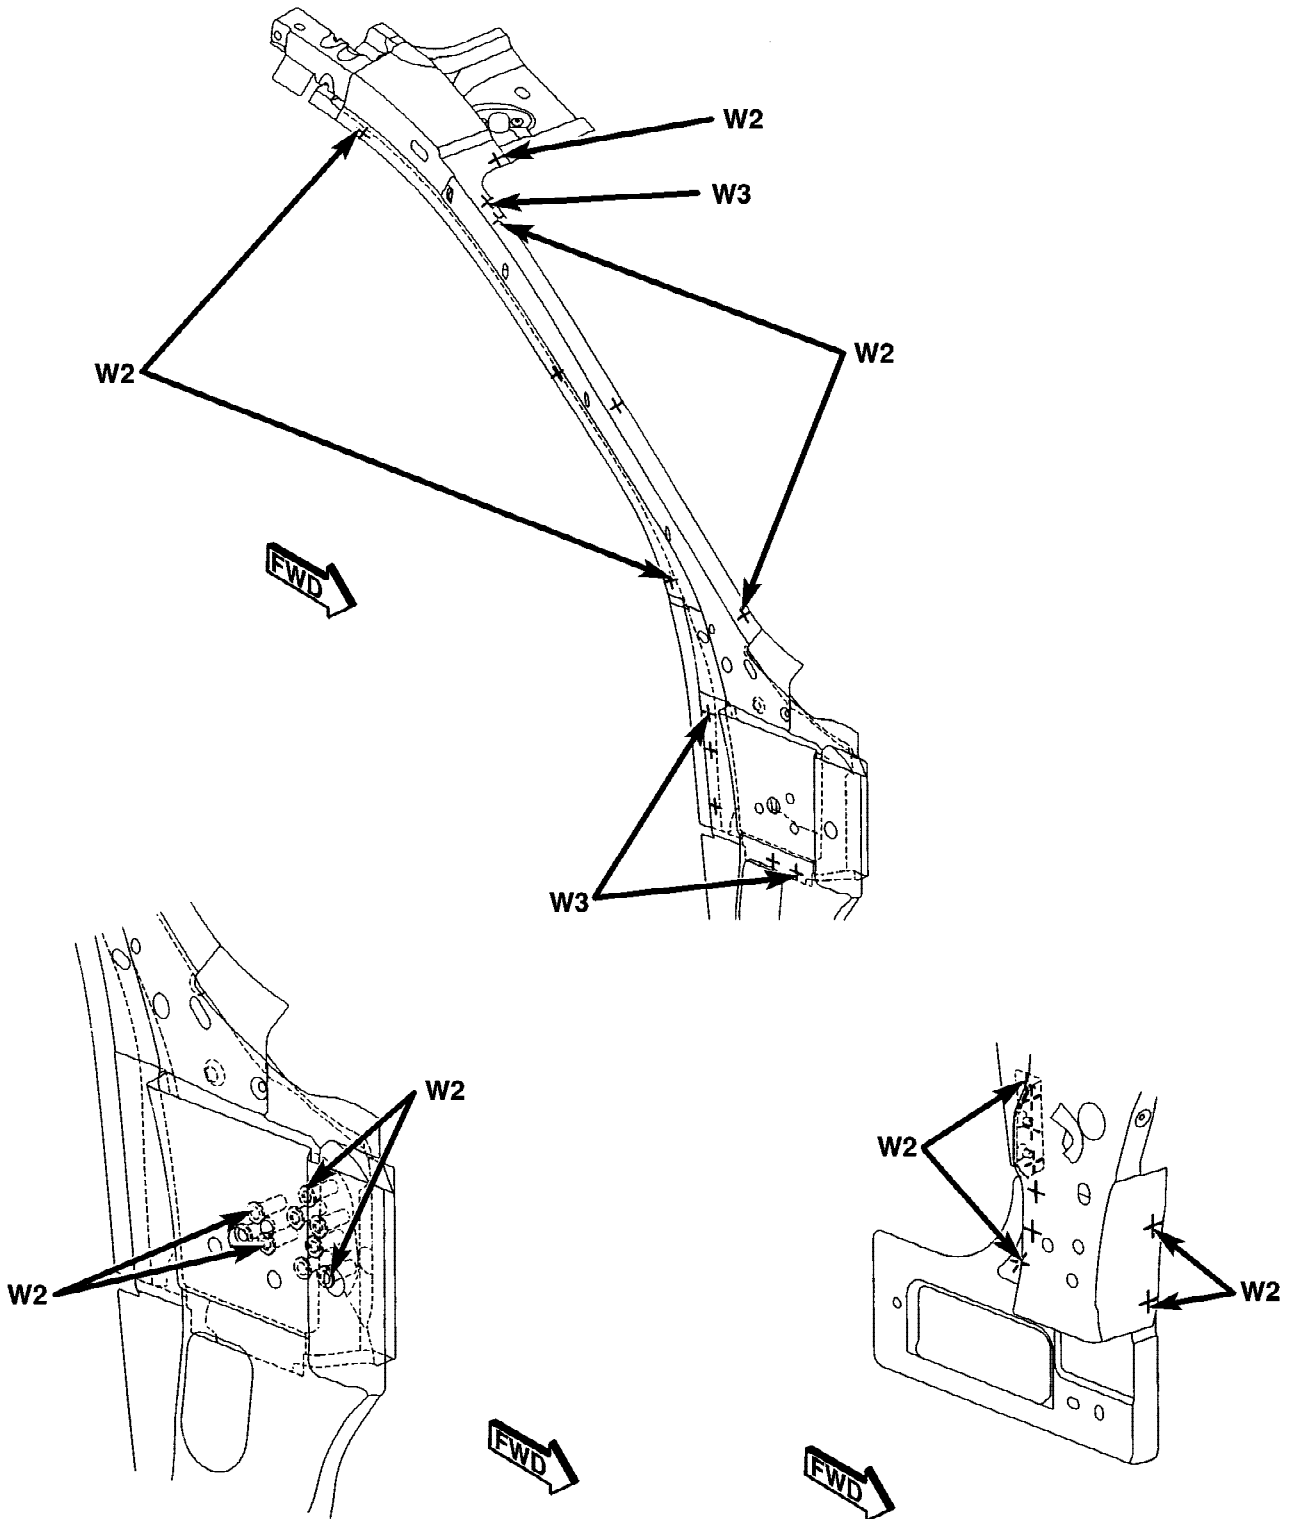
INNER SILL EXTENSION TO BODY SIDE APERTURE BRACKET TO REAR FLOOR PAN
